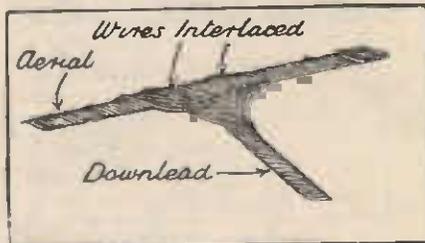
The final operation in making the Fig. 1a joint is to interlace the strands as shown here. Soldering is necessary to ensure good electrical conductivity.
